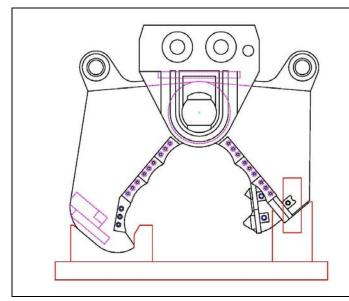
Stand Fixture for Demo Jaw / Coupler
